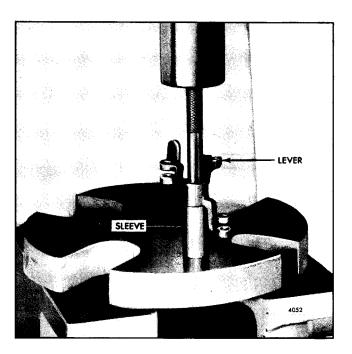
Removing Bearings from Control Link Lever using Tool J 8985
